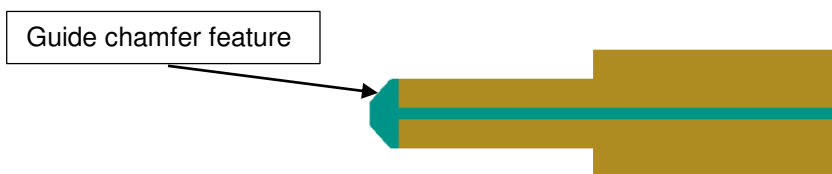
Recommended guide chamfer feature(2.0\*2.0mm) view of Laminated Mating Bus Bar Board.
